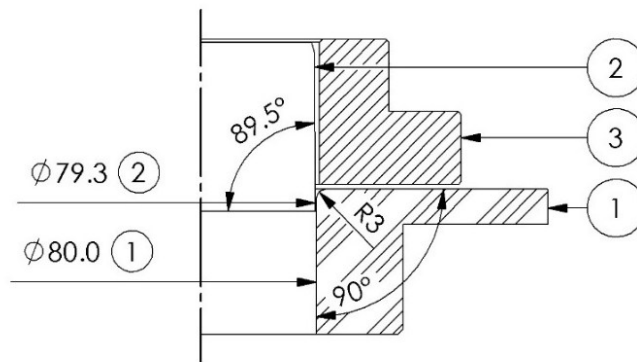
Compression-drawing toolset (quarter section) and main dimensions. ① mold, ② punch, ③ blankholder
